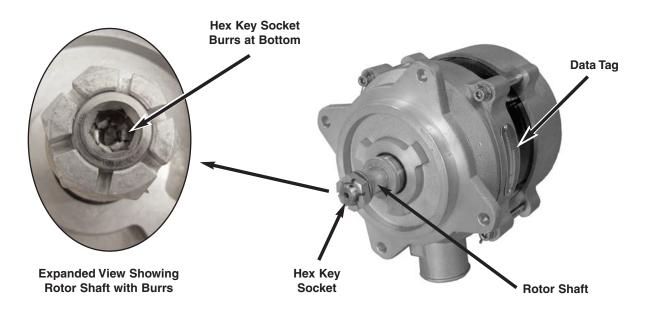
Typical Alternator with Rotor Shaft Close-up ES-10024 (CMI 656802) Gear Driven Alternator Shown (Other alternators affected are similar.)
